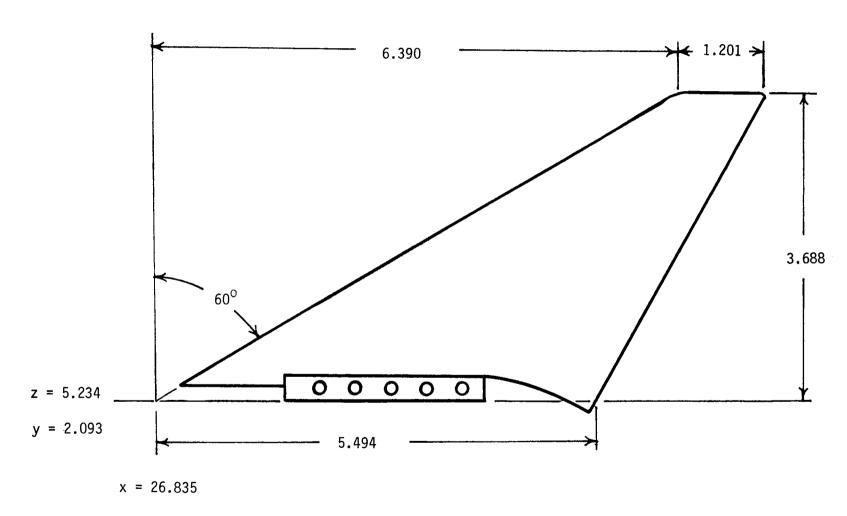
Details of model vertical tail. Linear dimensions are in inches.
